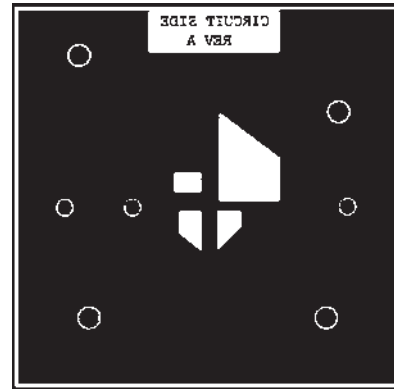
EVAL-AD8170EB Board Layout (Solder Side)
